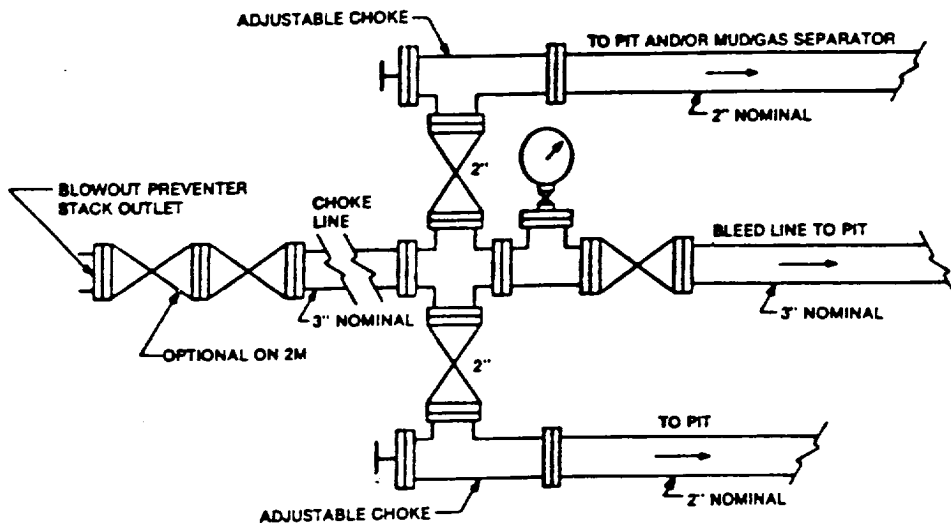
Typical choke manifold assembly for 2M and 3M rated working pressure service — surface installation.
